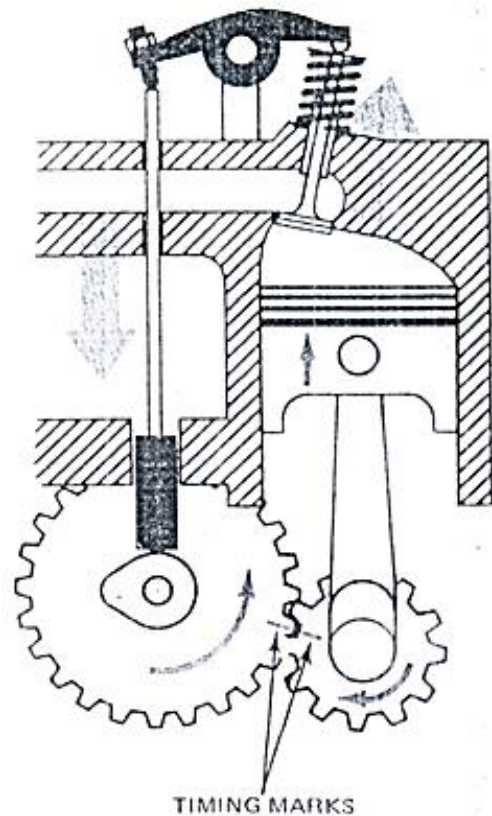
Valve train of previous picture, showing how the valve closes when the cam lobe moves out from under the valve lifter.
